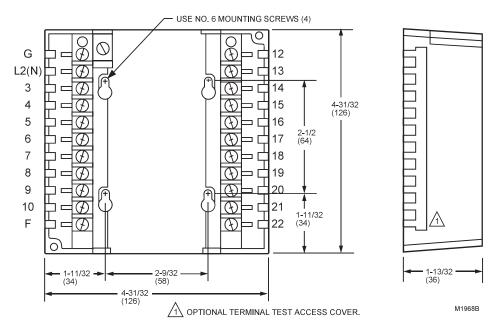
Top and front view of Q7800A1005 Wiring Subbase (2-sided) with dimensions in in. (mm).
